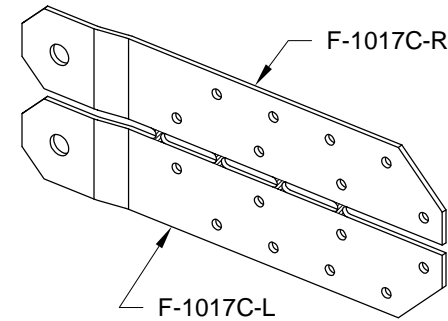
SEPARATE F-1017C SEAT BELT ATTACH LUG
